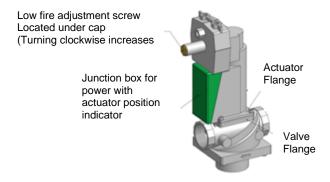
DR3500 – 5000 SKP25 Regulating Gas Valve Actuator & SSOV
